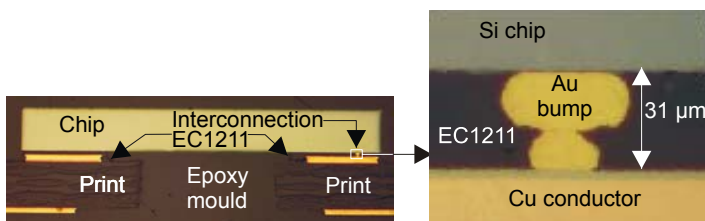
Cross section through bump – pad electrical interconnection between flip-chipped MEMS pressure sensor chip and print.
